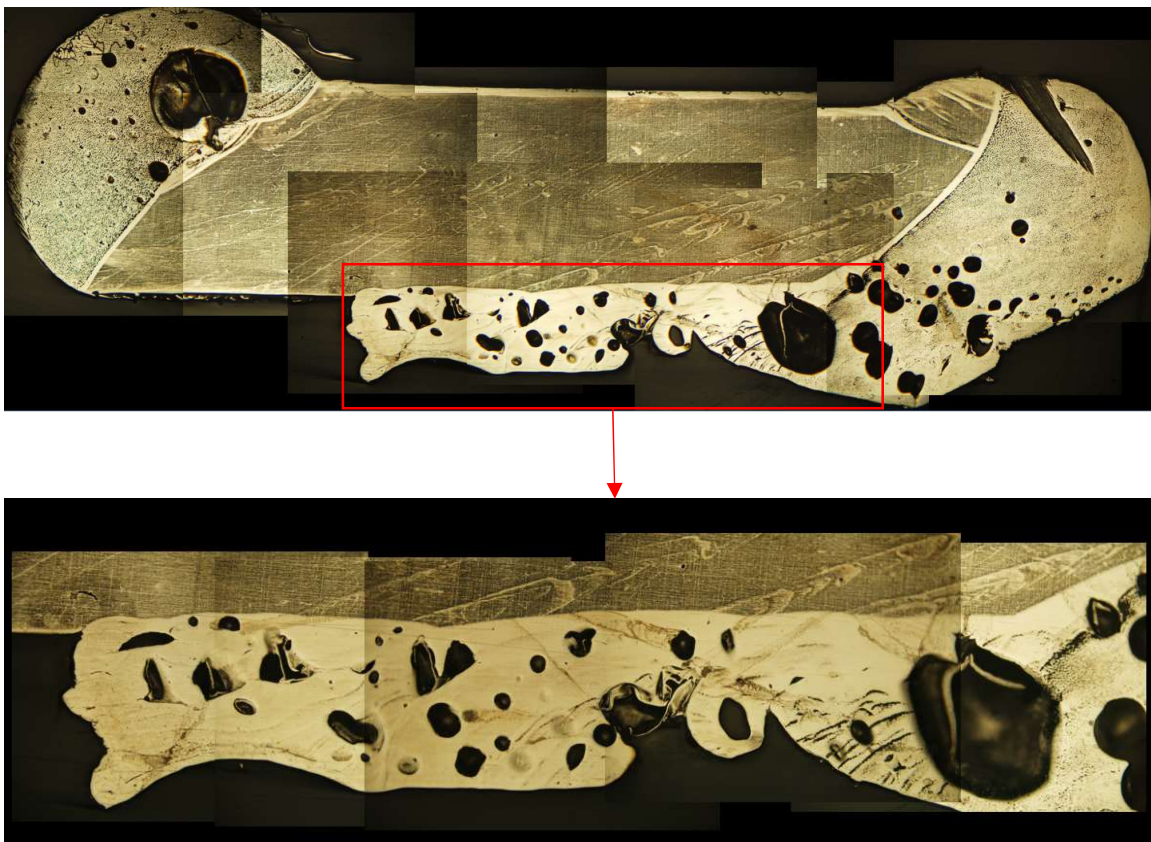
Weld section containing welds C and D. Weld C is located at the top left corner of the upper picture and contains fine, equiaxed grains. Weld D is located in the bottom right of the upper picture and magnified image is displayed below.
